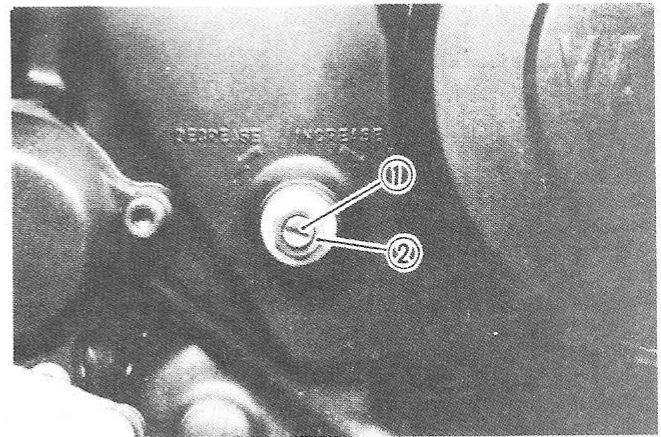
On four stroke models, the clutch is adjusted by loosening the locknut (2) and turning the adjuster (1) (Sec 20)
